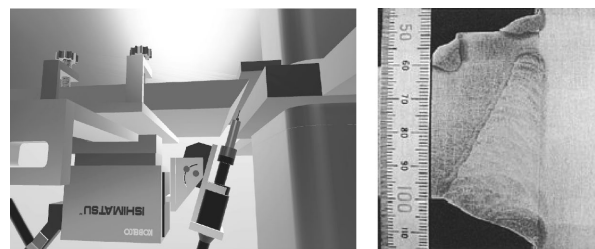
On-site welding of 40 mm-thick- beam-column joint using ISHIMATSU™ robot in overhead position¹⁷⁾
